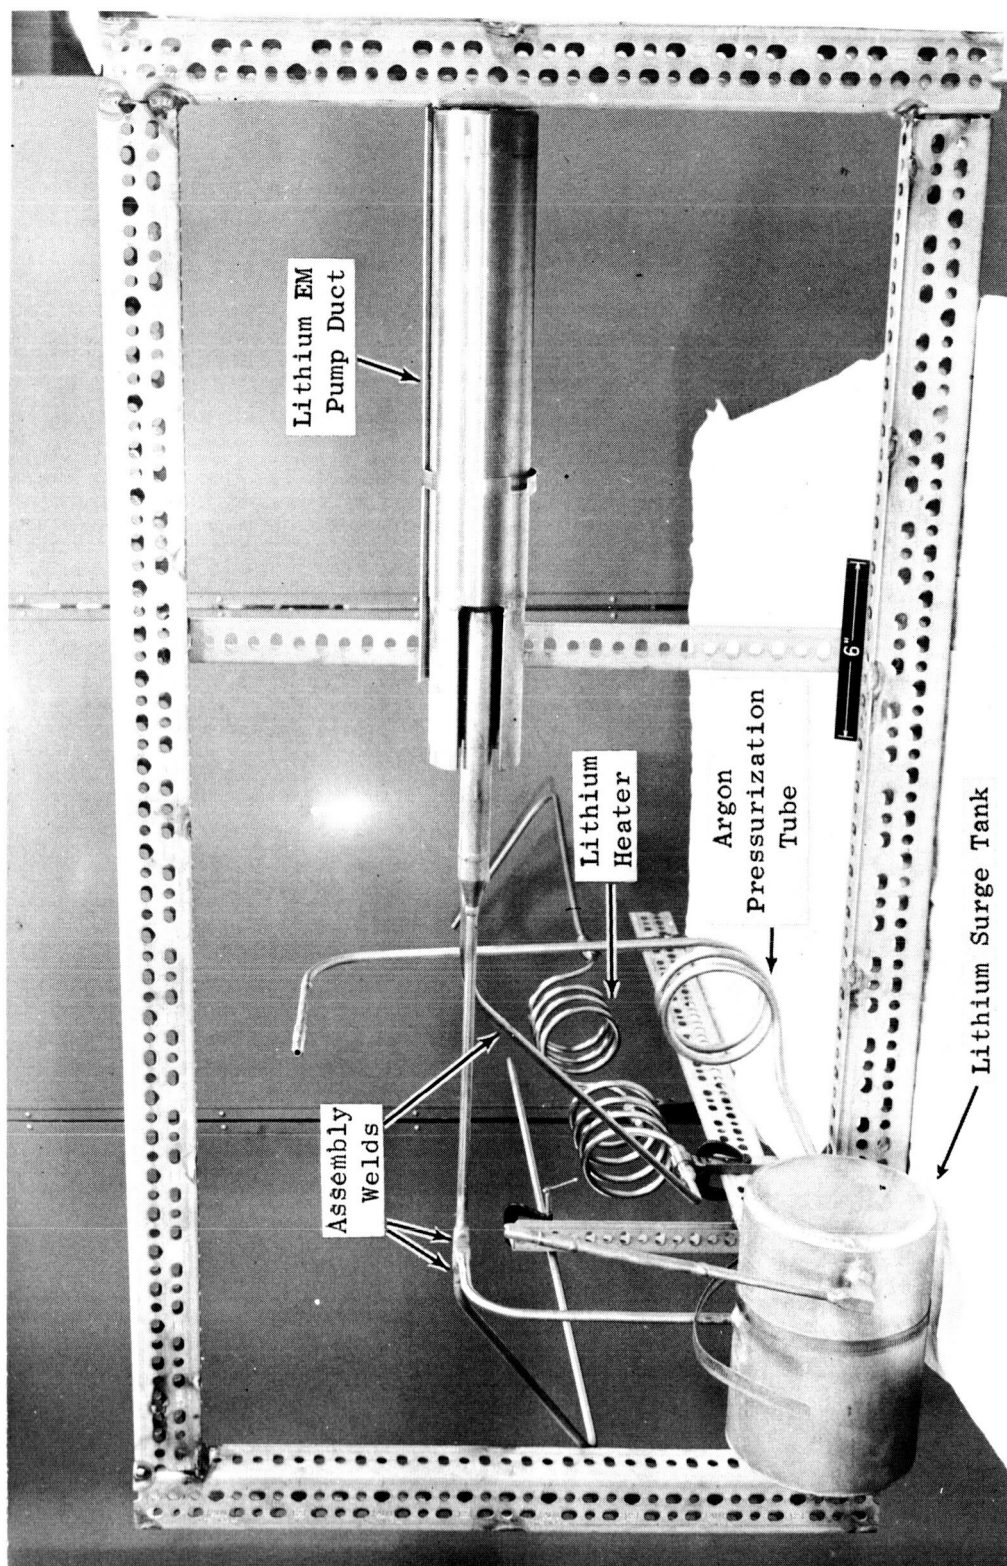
Lithium heater pump subassembly of T-111 corrosion test loop mounted on welding fixture.
